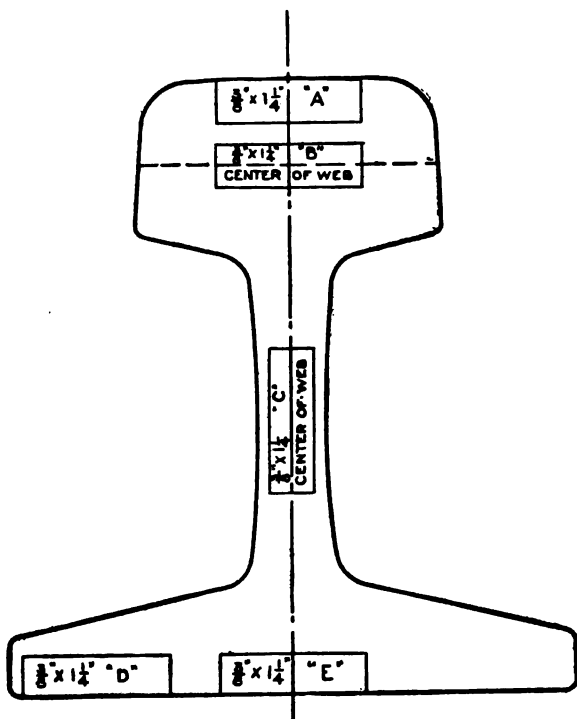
Test Pieces 16 inches long. Diagram of Flat Test Pieces. Tensile Tests on Rail Steel. (Wickhorst.)
